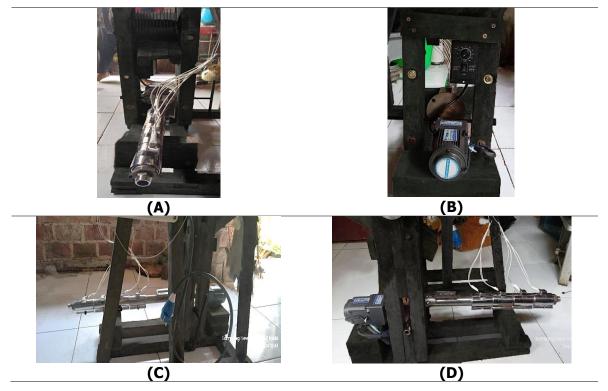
(A) Front View of Extruder; (B) Rear View of Extruder; (C) Left View of Extruder; (D) Right View of Extruder
